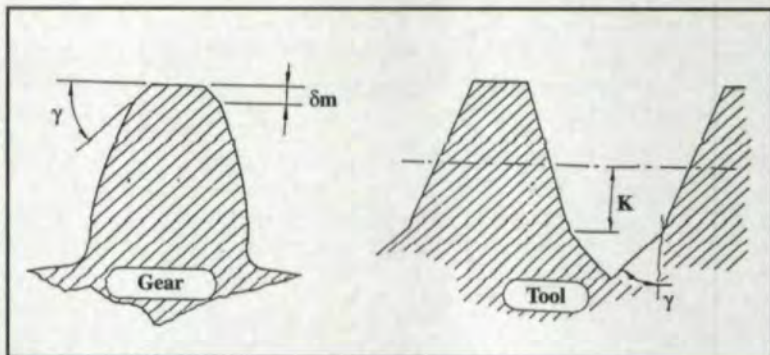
A) End of chamfer along lead; B) Basic rack of preshave tool.
